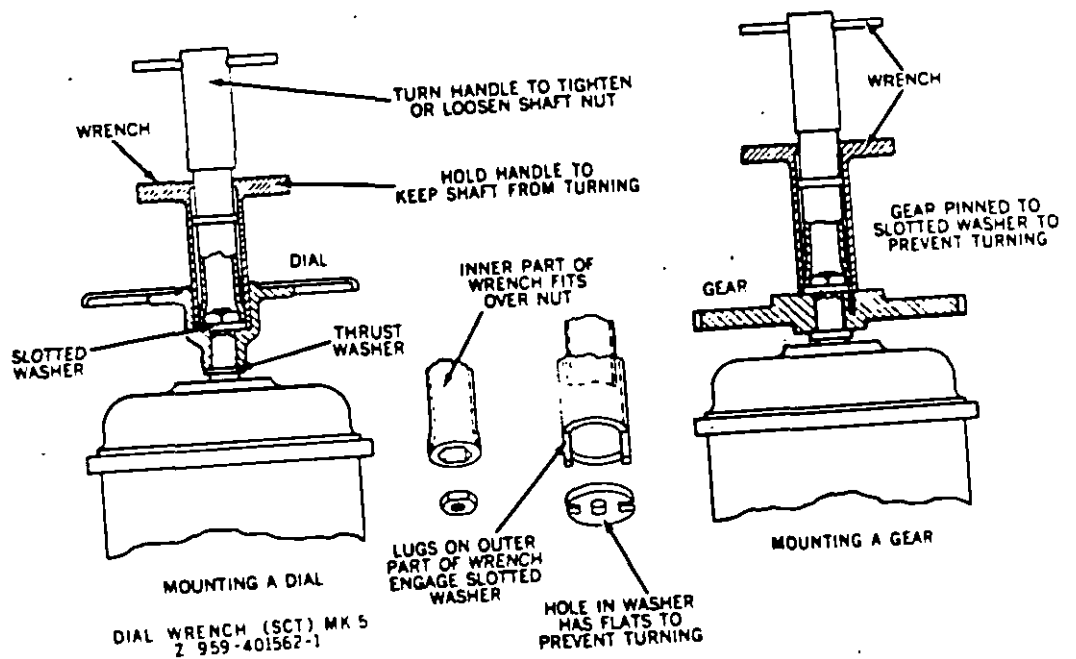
Mounting gears or dials on pre-standard synchros.
